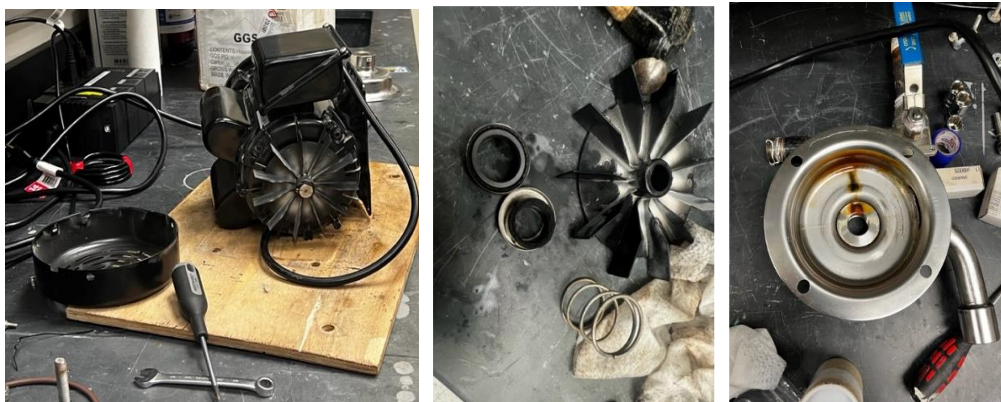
Chemical handling pump (left), disassembled impeller (center) and pump's volute (right).
